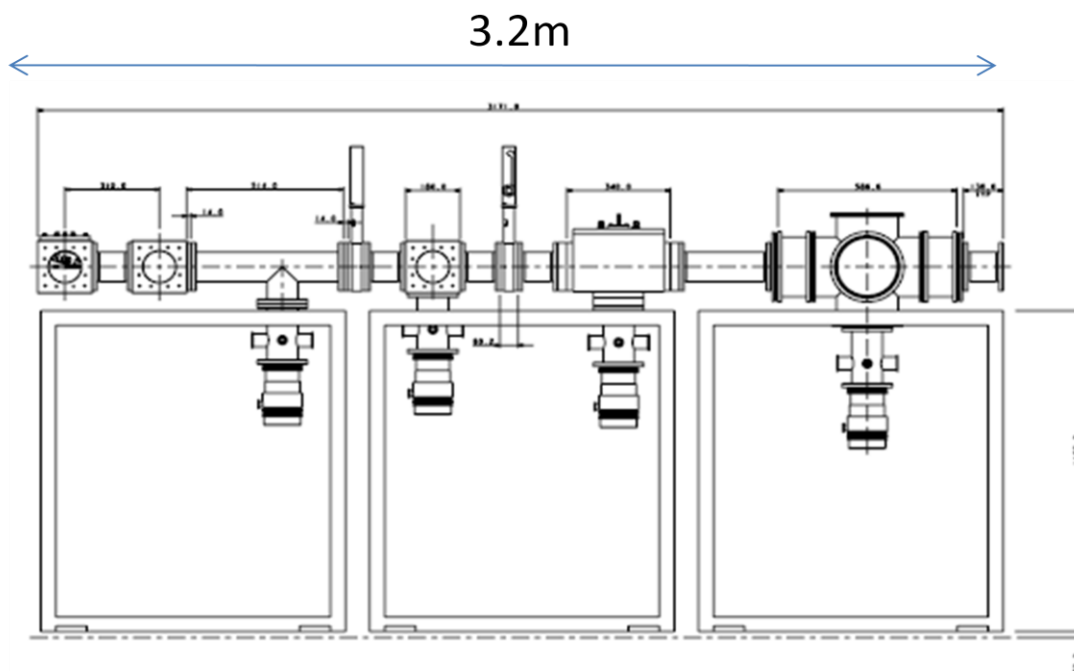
Technical drawing showing new beam line that will be installed as part of this experiment.
